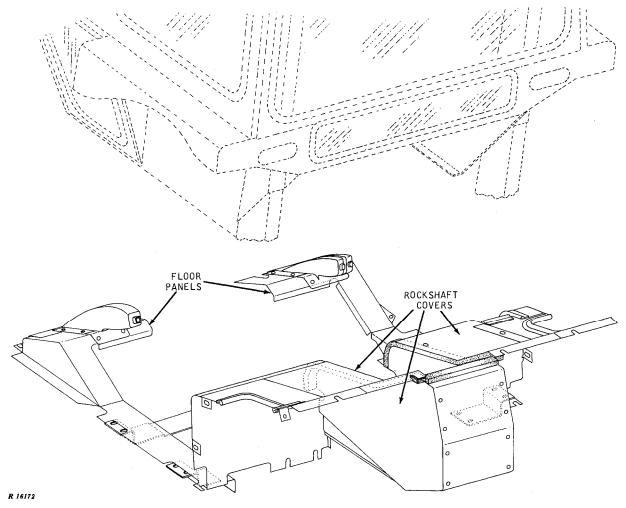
Roll-Gard Cab Floor Panels (Stolper)
